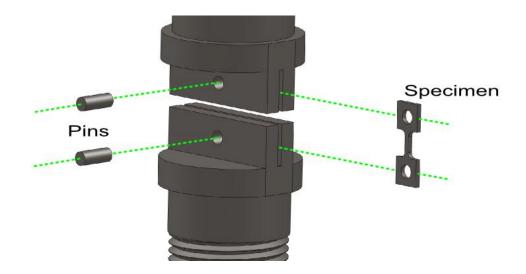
Exploded view of tensile test set up with newly designed miniature specimen, slotted mounting grips and the loading pins
